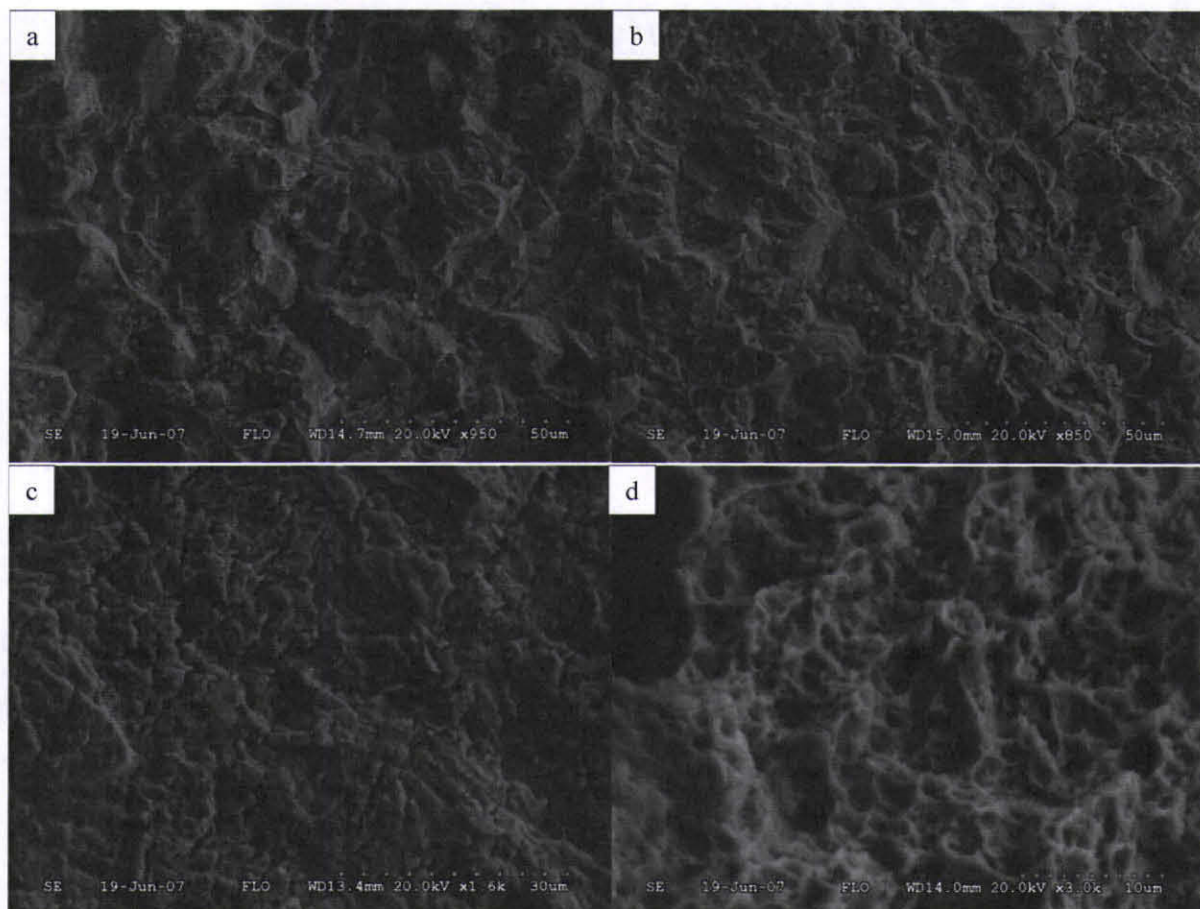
Representative picture of fracture surface as observed in SEM for bolt 6.
